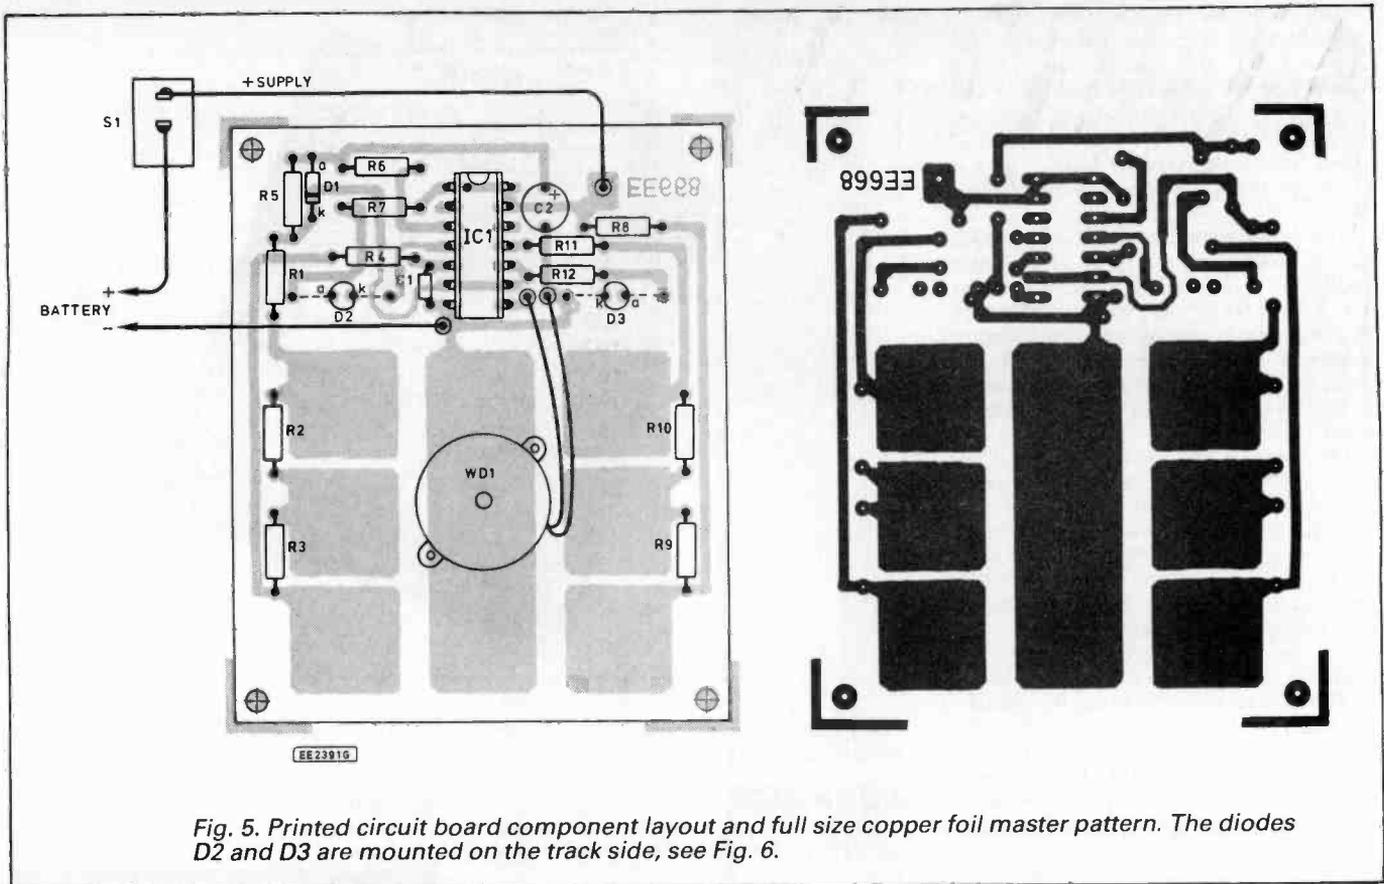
Printed circuit board component layout and full size copper foil master pattern. The diodes D2 and D3 are mounted on the track side, see Fig. 6.
